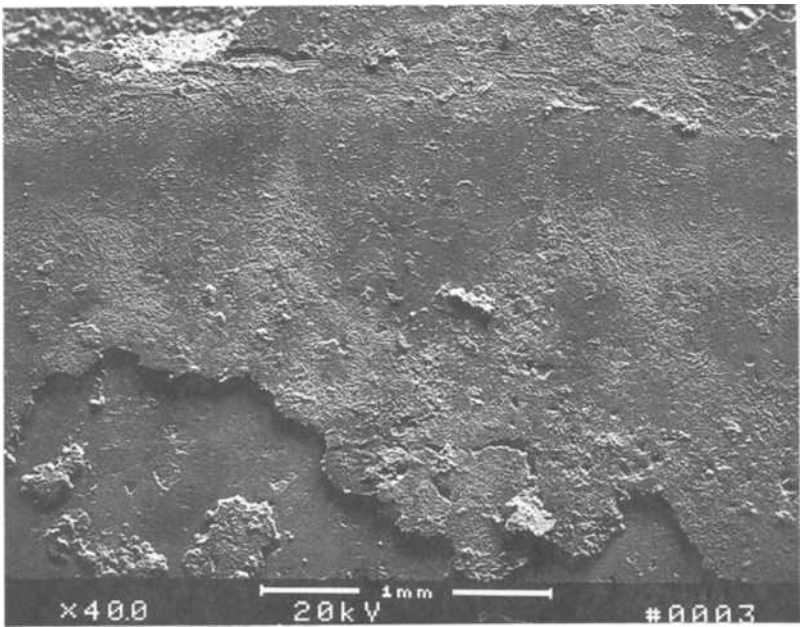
Nonleaking seal face with thick deposit film, primary ring.
